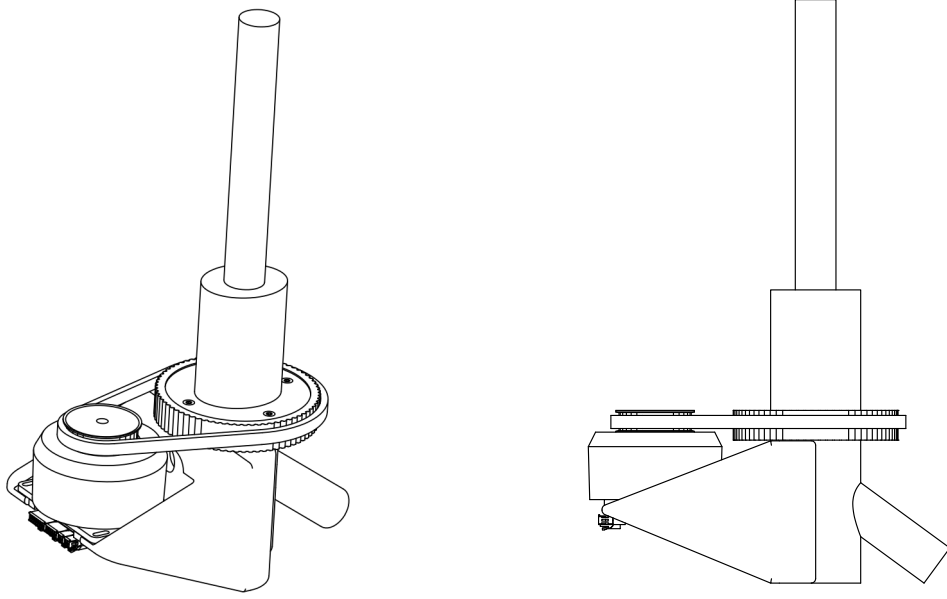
CAD drawing of the motor, two pulleys and the timing belt mounted on the E-Scooter. Axonometric view (left) and side view (right).
